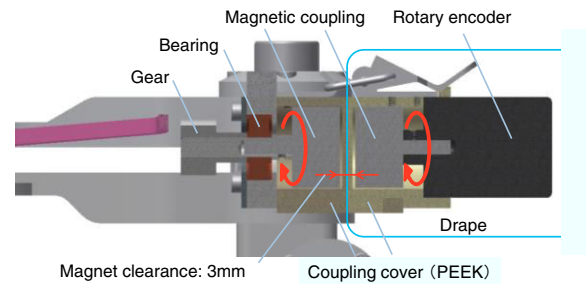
Detailed view of the rotary encoder unit using magnet couplings, PEEK coupling covers and draping
